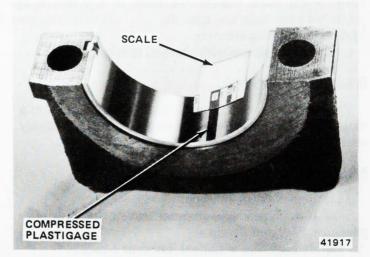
B-62 Checking Main Bearing Clearance with Plastigage
